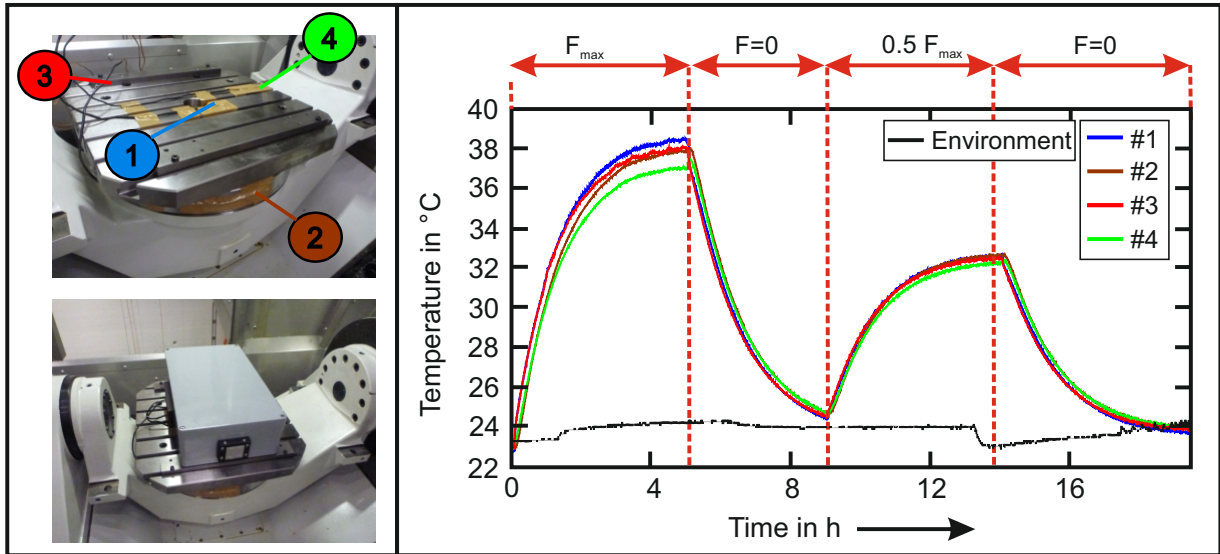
Machine tool A/C - Rotating a machine tool table with $v_{max} = 60 \text{ min}^{-1}$ for five hours followed by a cool-down of four hours. After that, rotating the table with $0.5v_{max} = 30 \text{ min}^{-1}$ for five hours, followed again by a cool-down of four hours. Nr. 1 – 4 mark the four sensor positions according to the measurement in the right diagram (corresponding colours).
